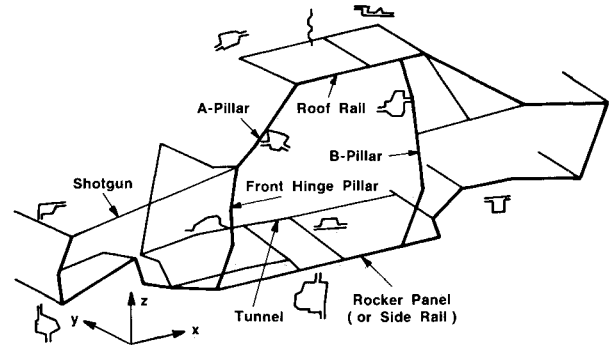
A half "stick" model with typical cross sections of beam elements.
